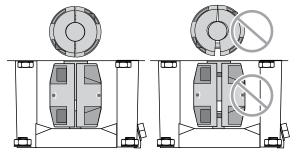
A - Make Sure that the Coupling Halves are Evenly Tightened
